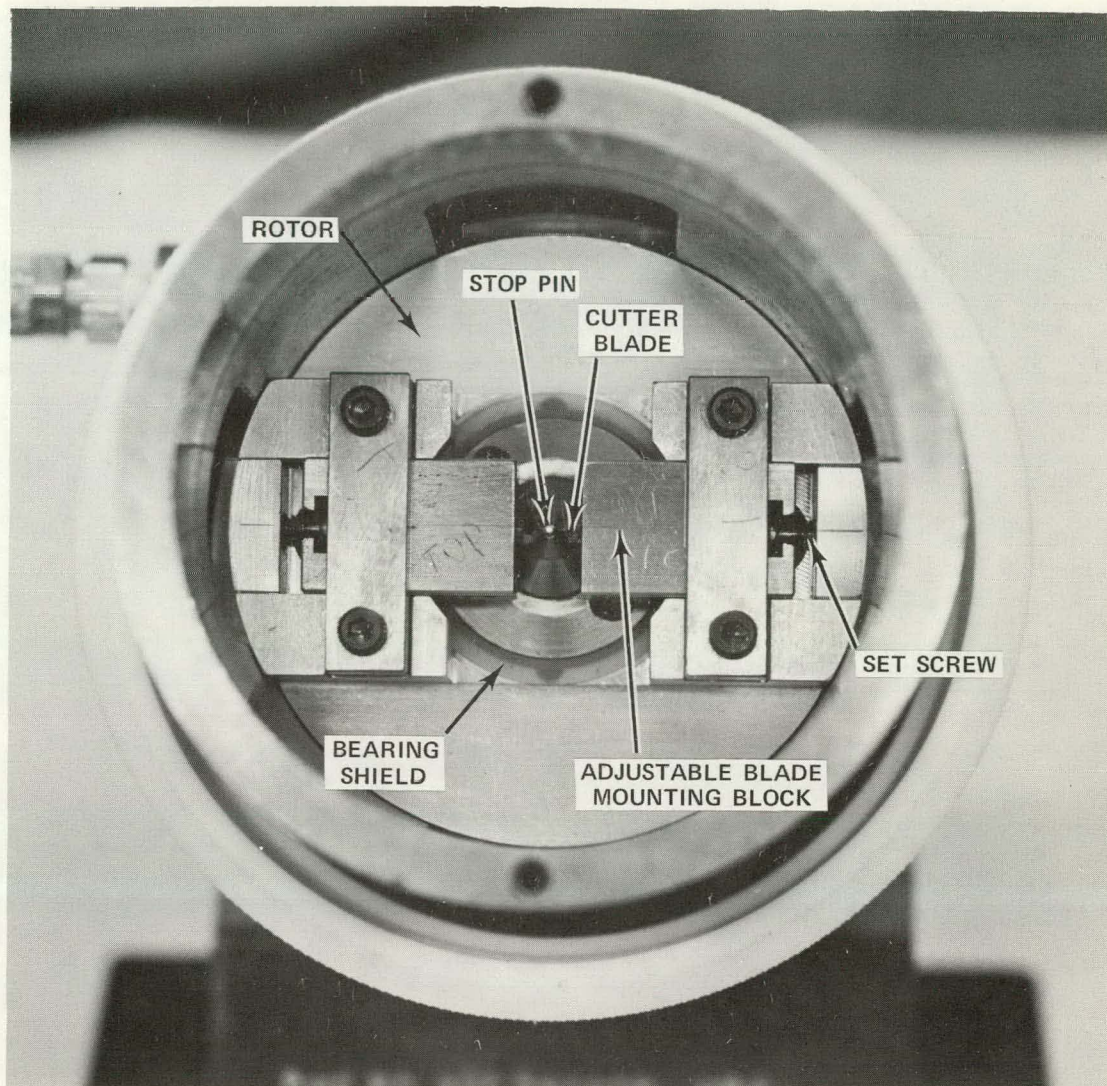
Internal view of deburring tool shows adjustable blade mechanism.
